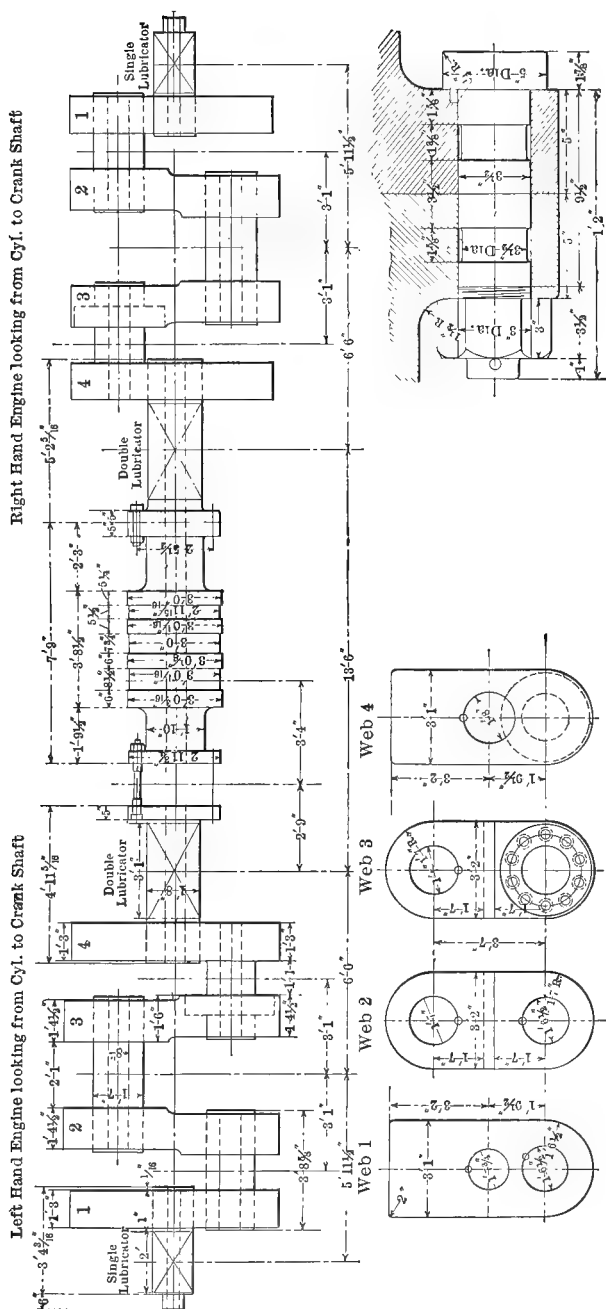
Three-Throw Crank Shaft for Twin Engine (English Design).
